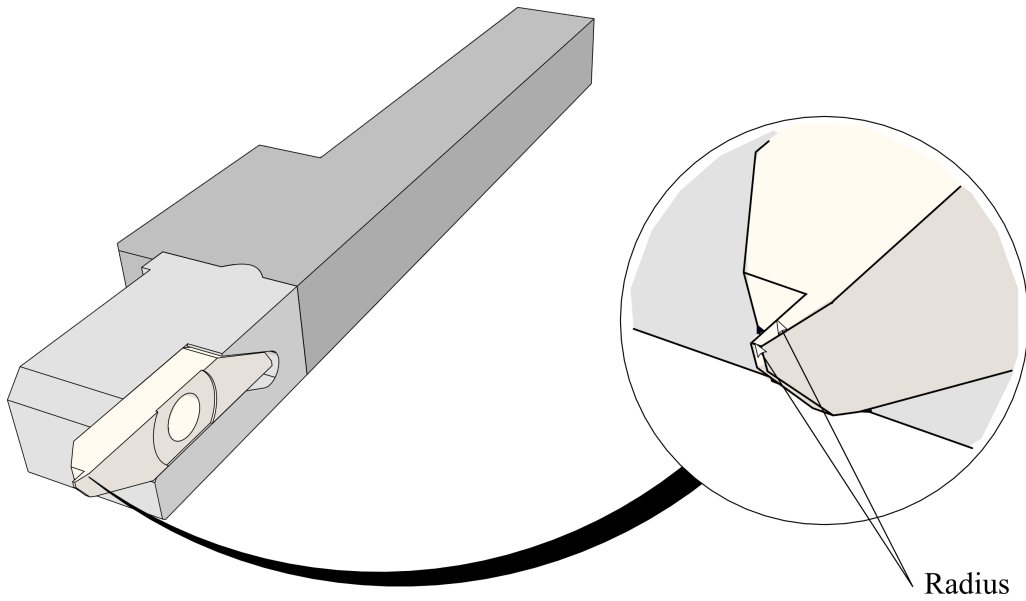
Microturning tool used to illustrate the method of measurement: inside tool holder (left), zoom on edge (right).
